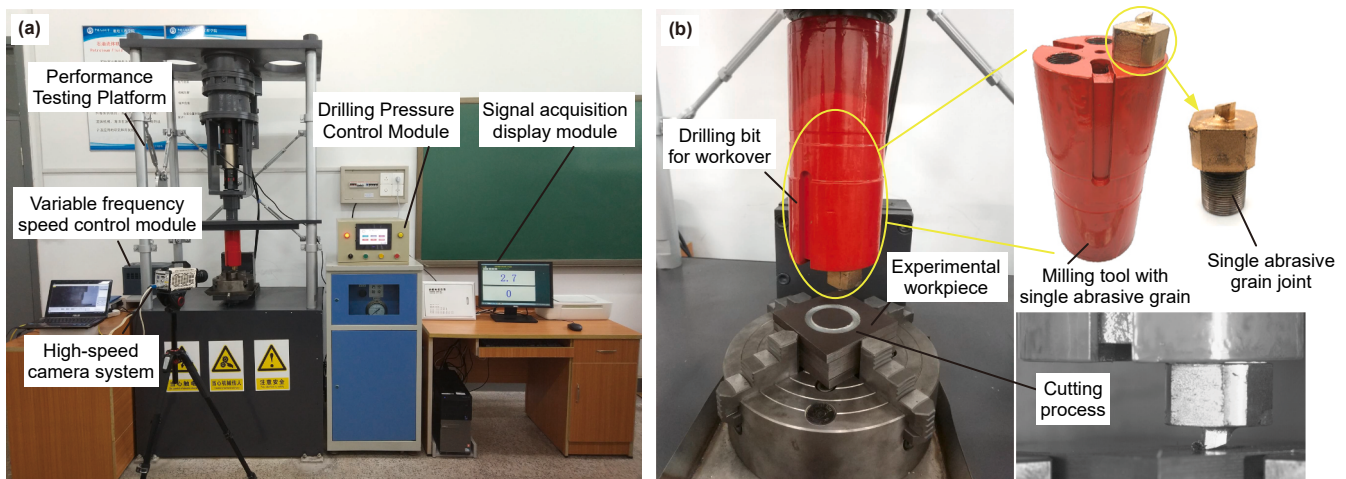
Cutting experiment process of single abrasive grain. (a) Experimental system for milling tools; (b) Milling tool with single abrasive grain.
